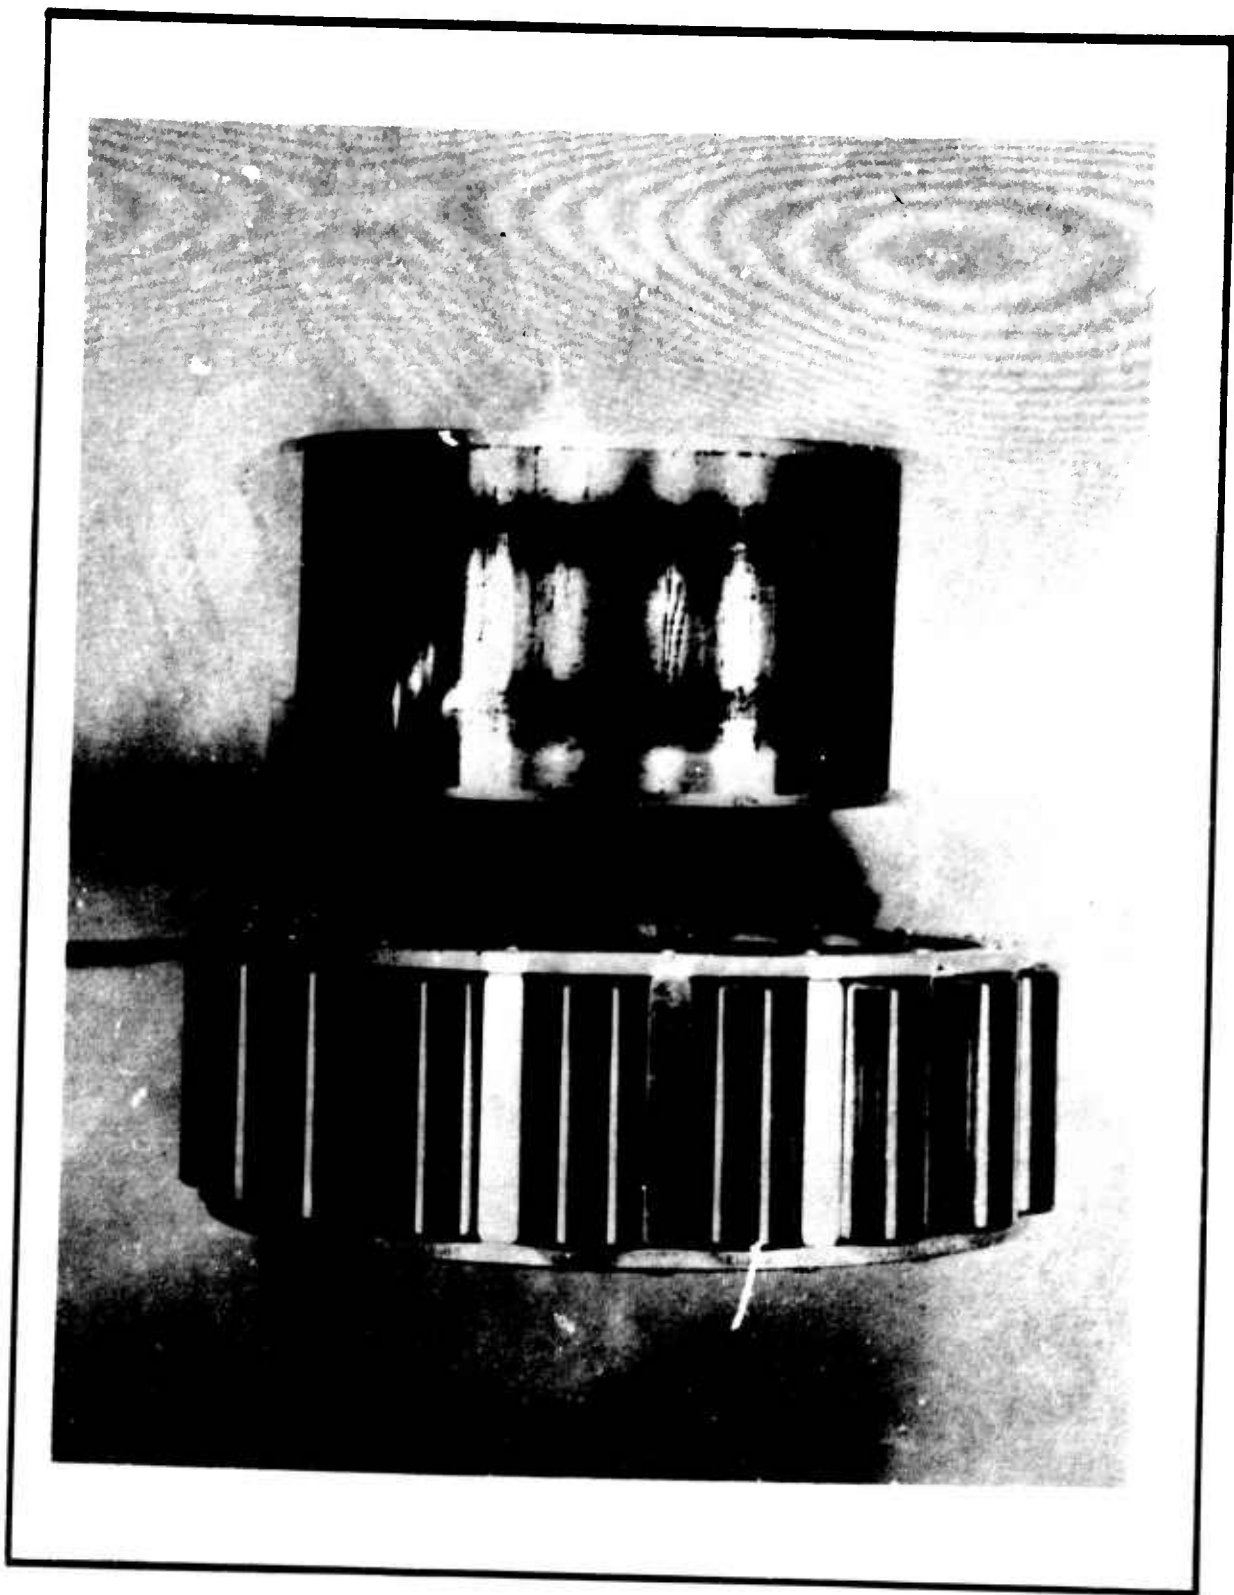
Test No. 3 (one of 4 bearings) - View of Ag plated inner race and roller-cage assembly from cylindrical bearing - coating intact and polished
